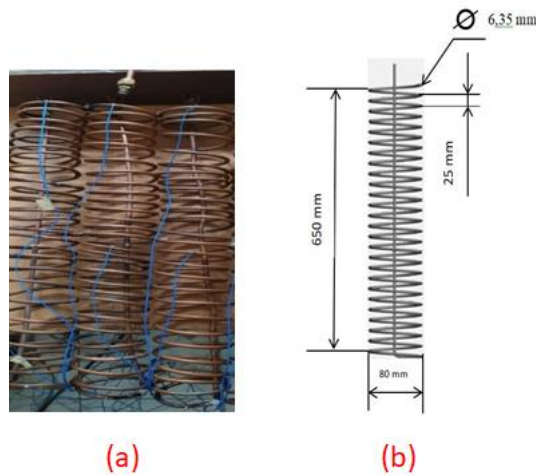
The shape of evaporator; (a) a photograph of evaporator, (b) dimension of the evaporator
